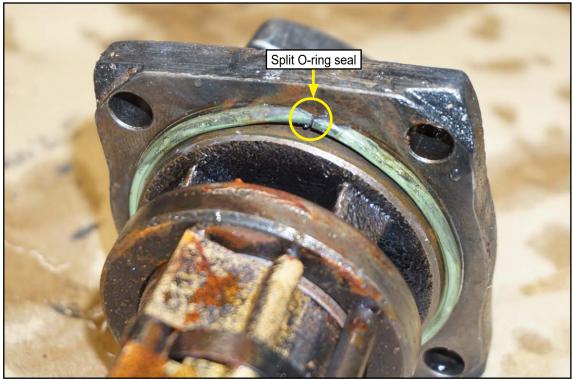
AE1 left-hand fuel filter cover plate O-ring seal
